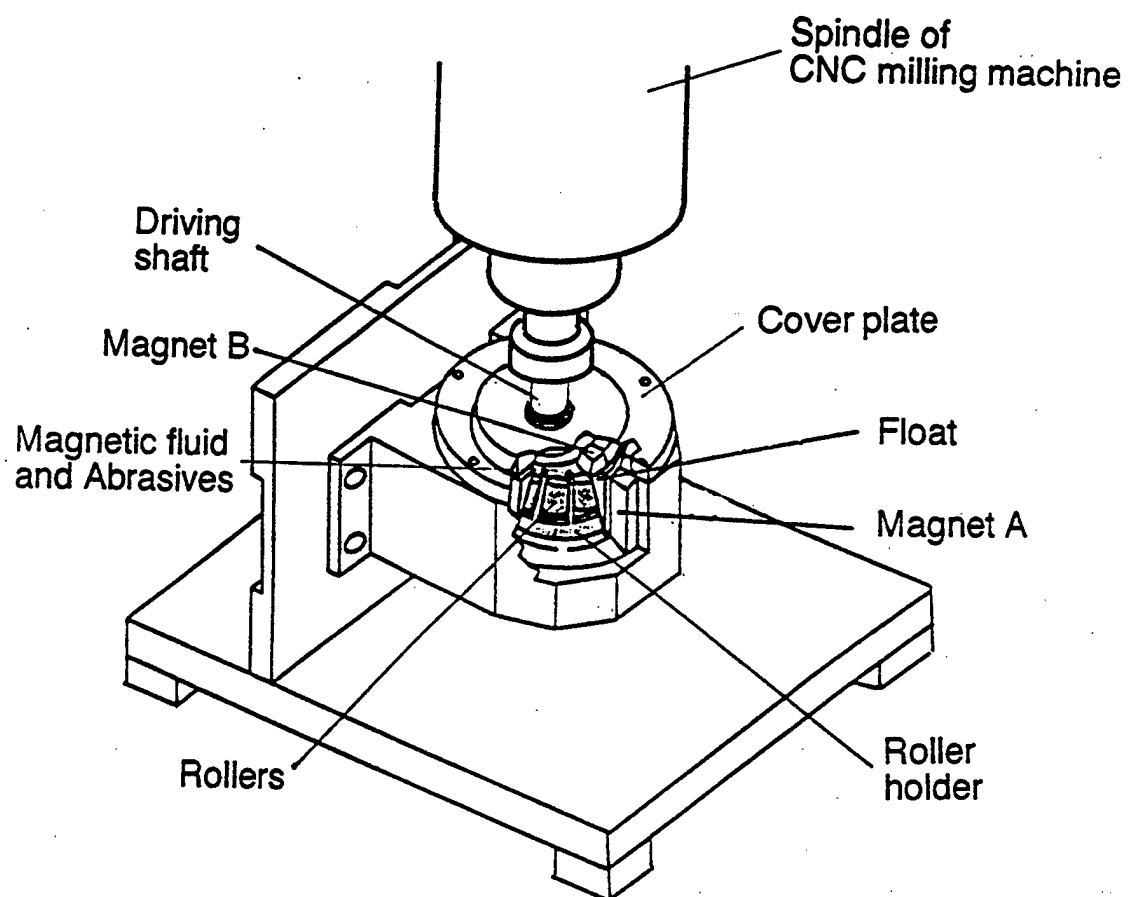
Schematic of the magnetic fluid grinding apparatus used for finishing ceramic rollers [21]
